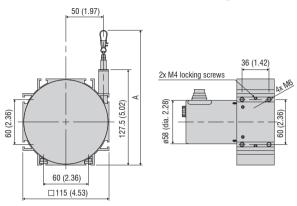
Dimensional drawing WDS- XXXX - P115 - XX - measuring ranges 3000, 4000, 5000 mm
